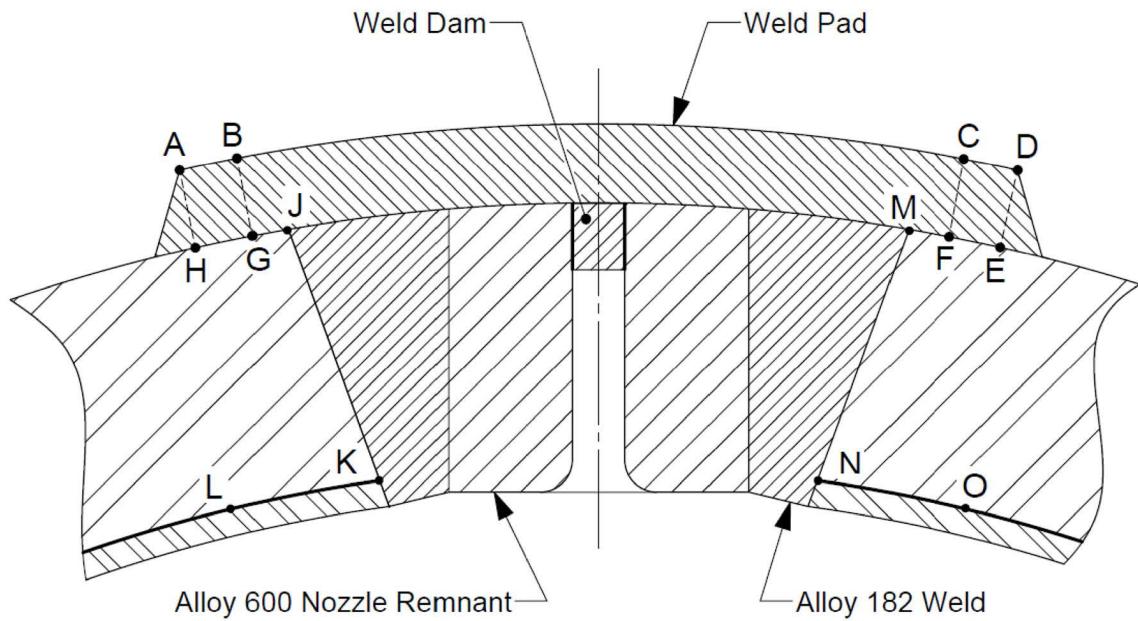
Volumetric Acceptance Examination of Weld Pad
